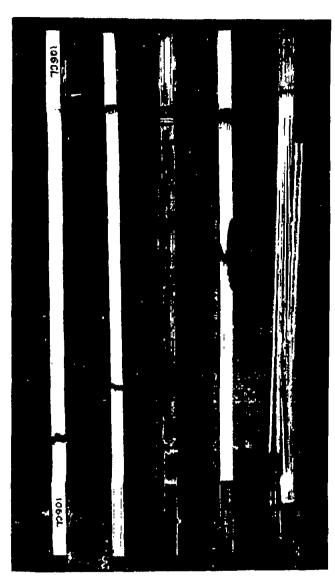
Static tension creep specimens showing type of fracture, left to right, materials CL, C, R, P and G.
